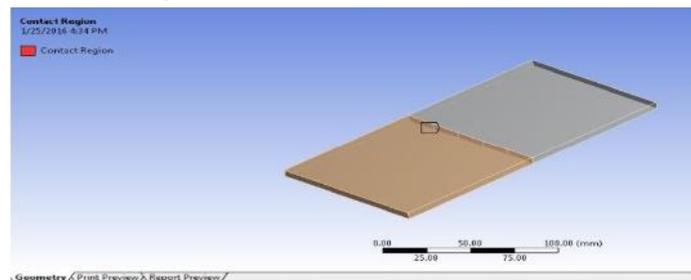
Geometry of the two plates and weld joint considered in Ansys
